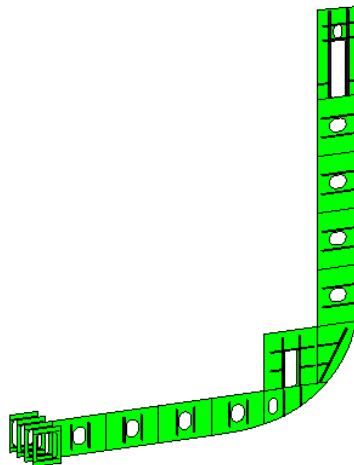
Arrangement of the stiffeners and holes in the floors and Web frames.
